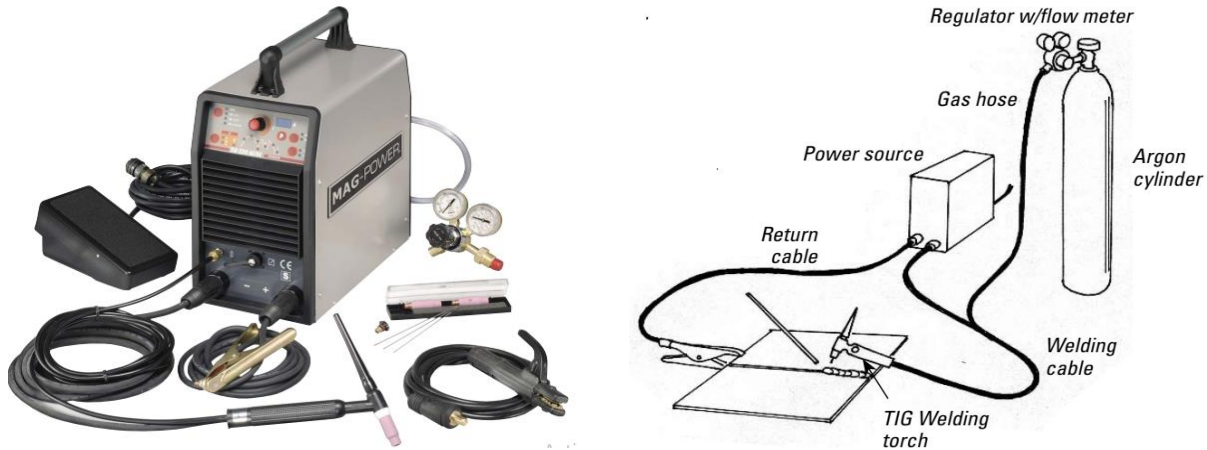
TIG Welding Machine with Its Accessories
